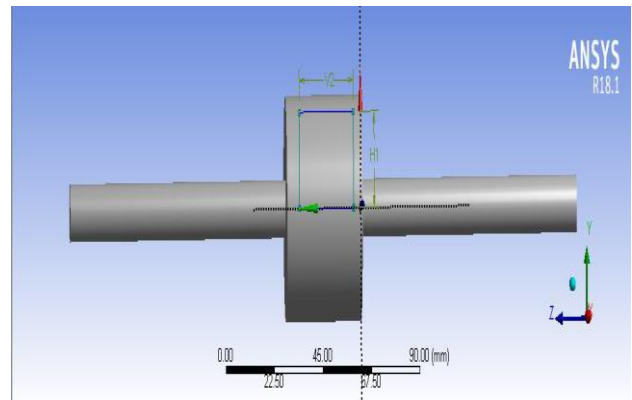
CAD model of piston and piston rod with internal sketch for mass removal using revolve tool.
